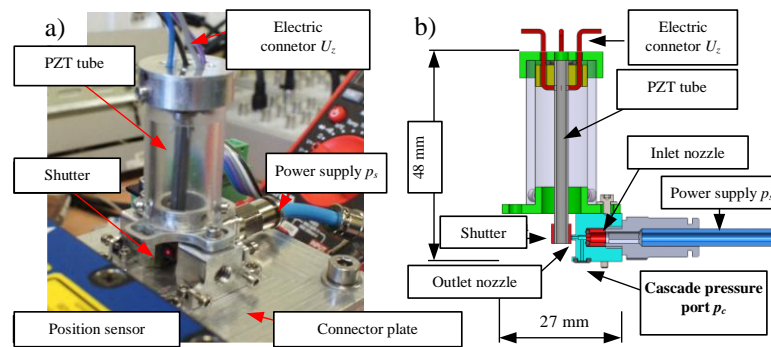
The application of piezo tube in pneumatic valve: a) test stand photo, b) drawing
